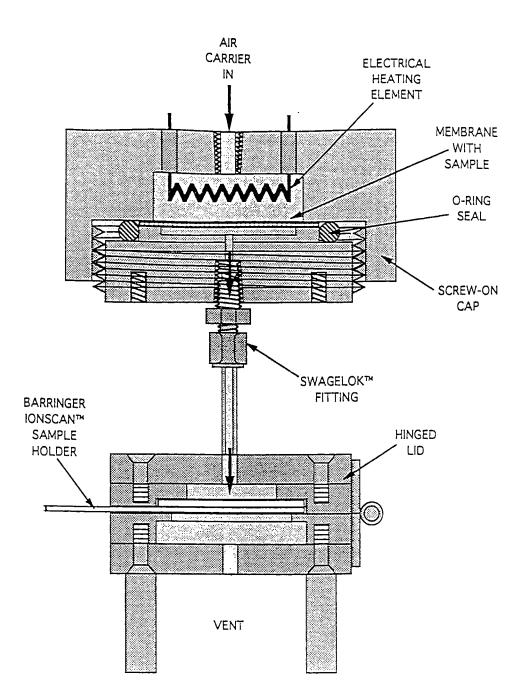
A cross-section view of the vapor generator/collector assembly.
